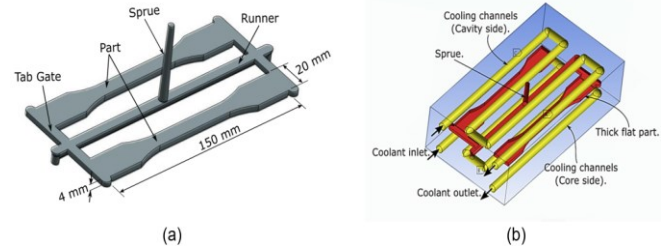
Mold inserts designed for the thick flat part; (a) Part design; (b) Cavities insert design
